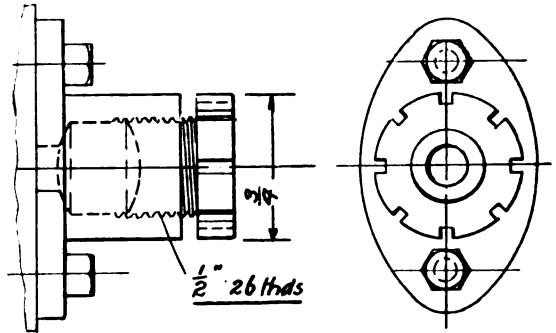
ALTERNATIVE ARRANGEMENT OF VALVE SPINDLE GLANDS. (Full size.)
